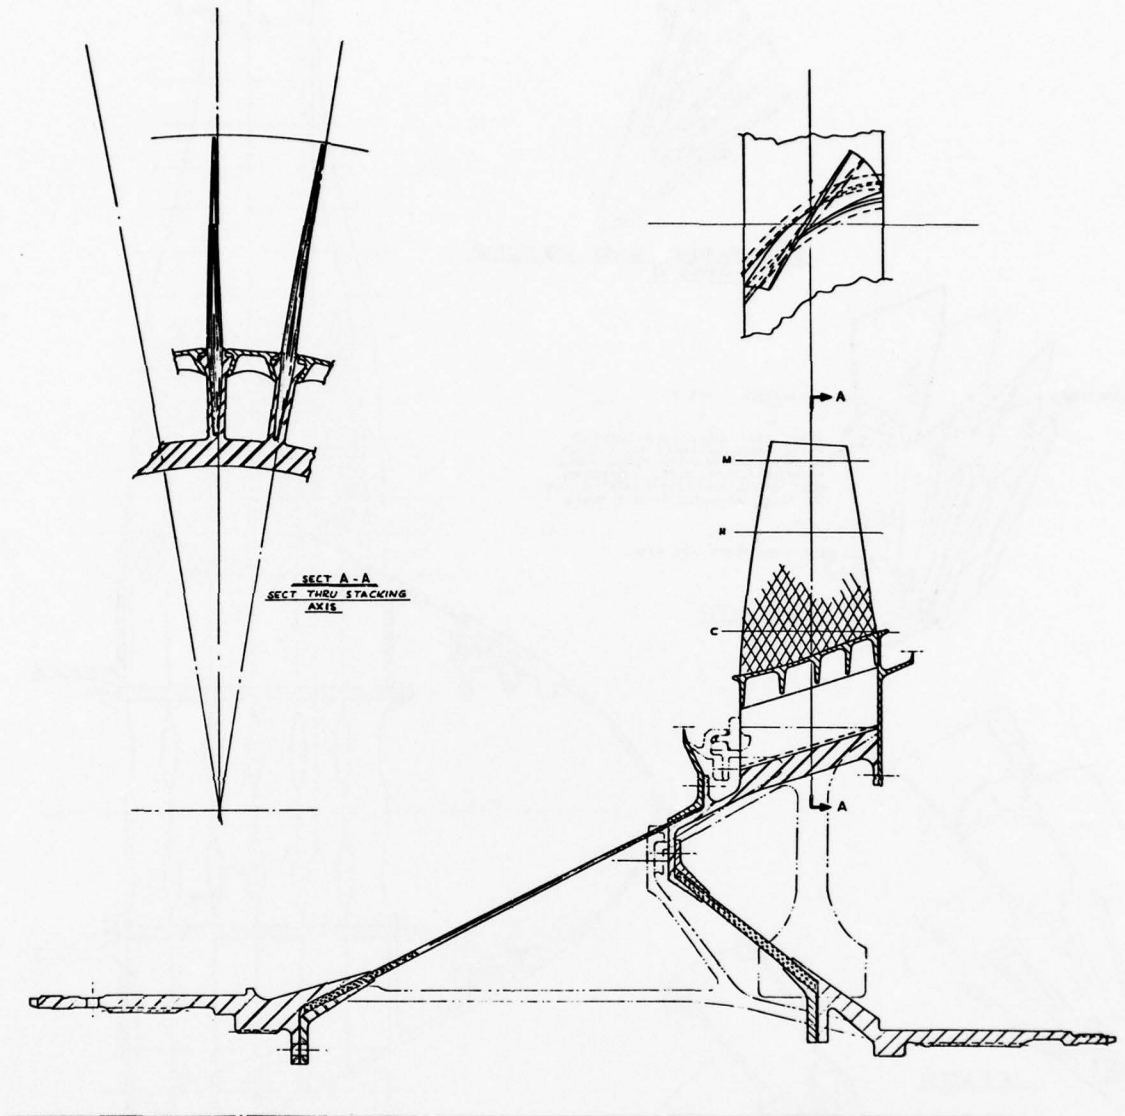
Supersonic-Flight Stage 2 Composite Blisk and Shaft Assembly.
